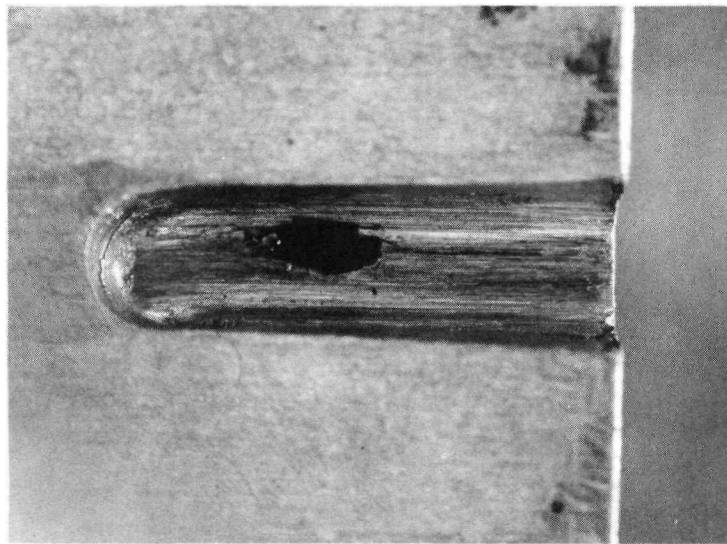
UPPER SURFACE OF 466A1941006 BEAM, S/N 2 SHOWING PARTIALLY MACHINED OUT CRACK; MAGN 9X
